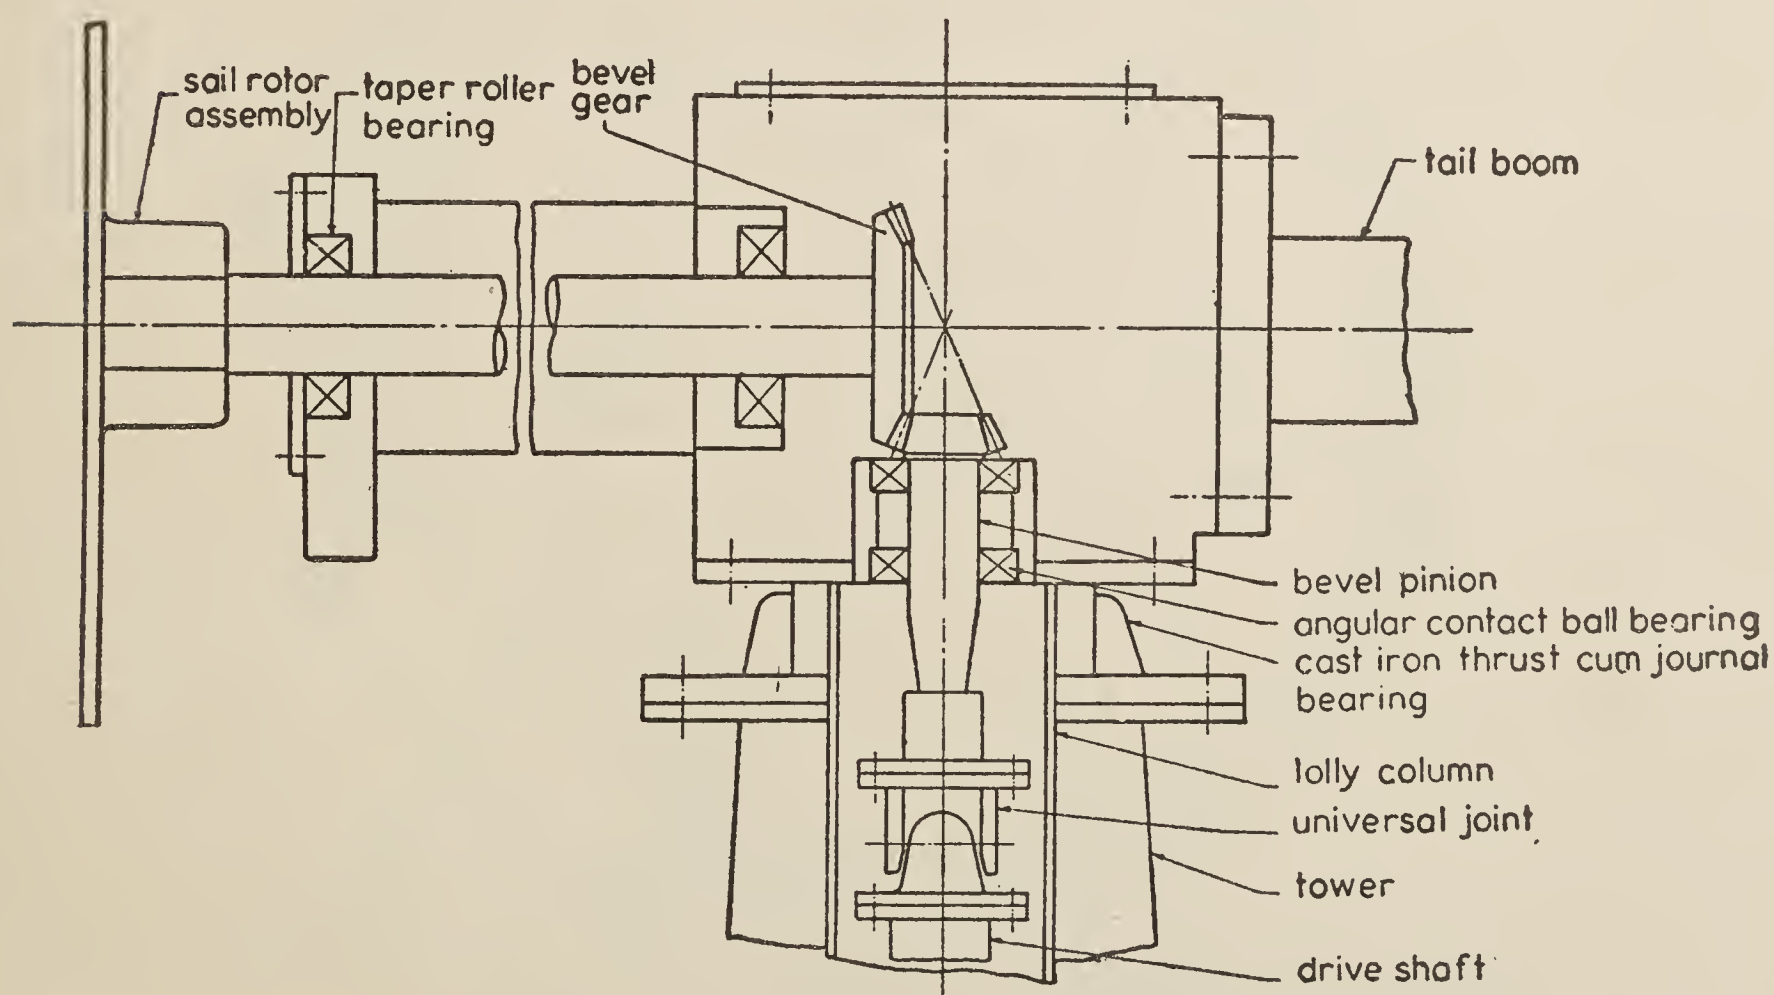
Head mechanism assembly built around a mass produced bevel gear set. Lolly column and cast iron bearings are also shown.
